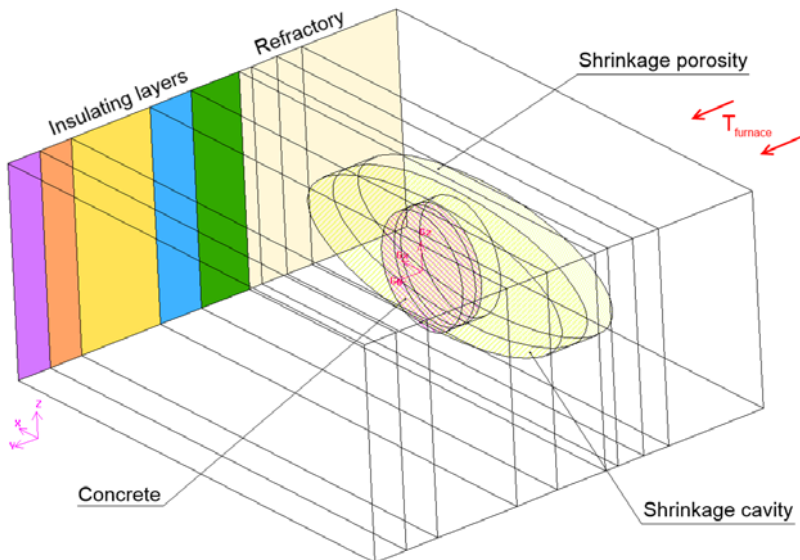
The industrial block model with insulating layers, casting defects and concrete sealing
